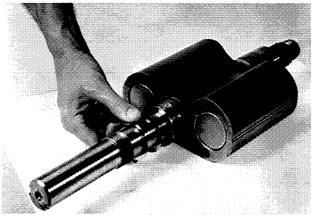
ASSEMBLING SHIMS TO DRIVE END OF DRIVE ROTOR SHAFT
